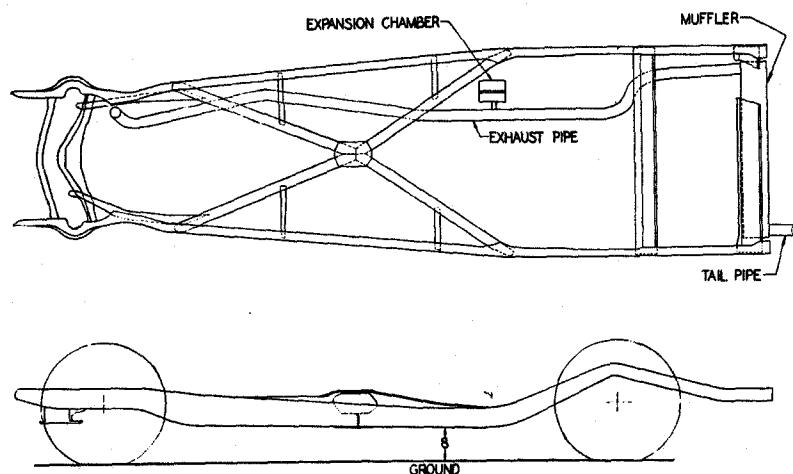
(left). General arrangement of 38-60 frame and exhaust system
